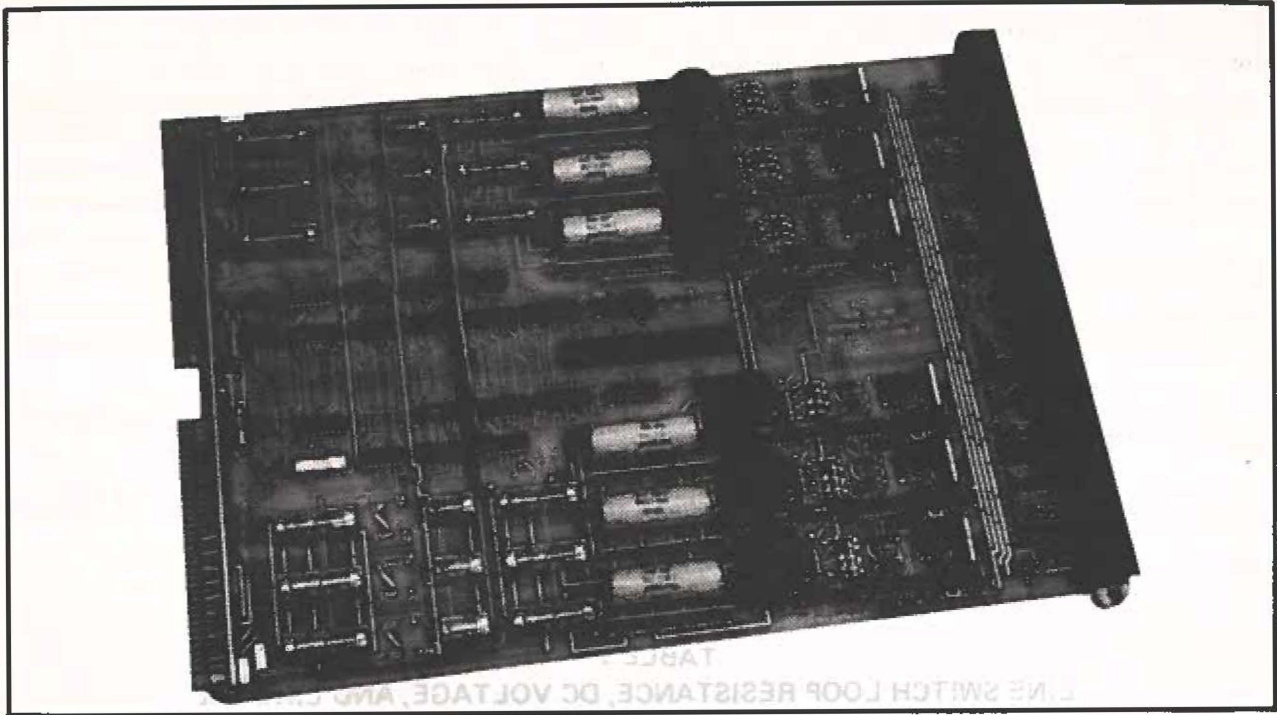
Typical Line Switch Printed Wiring Board Assembly
